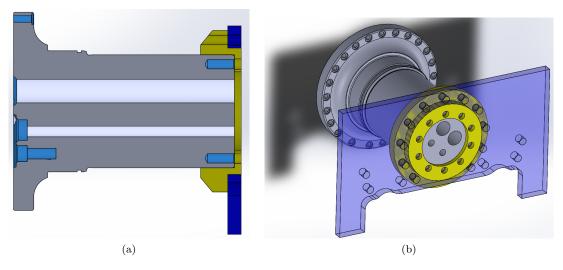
Stator shaft (grey), flange (yellow) and front plate (blue)
